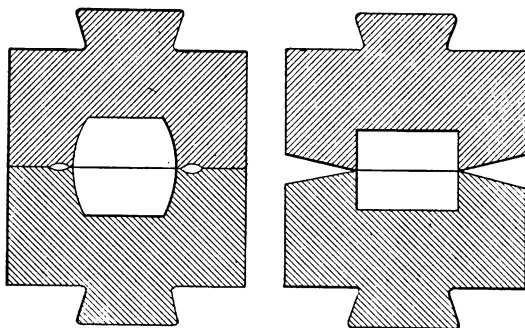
Stripping Die for Removing Fin Produced by Forging Process, and Work for which it is Used
